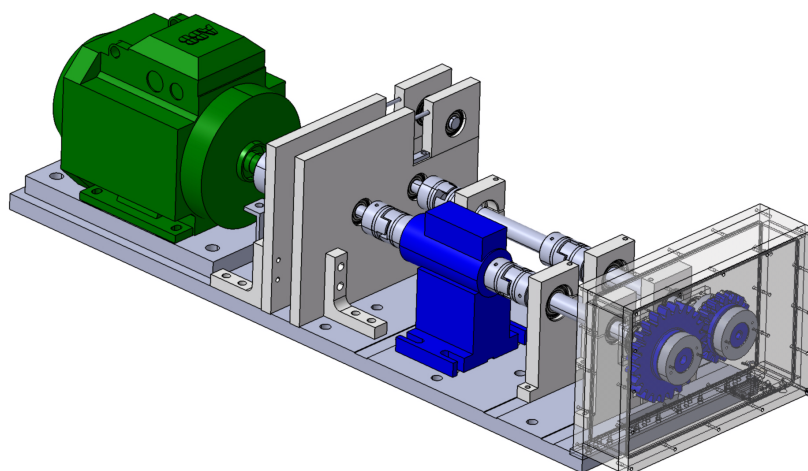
Chalmers gear test rig, a modified FZG gear test rig [9]
